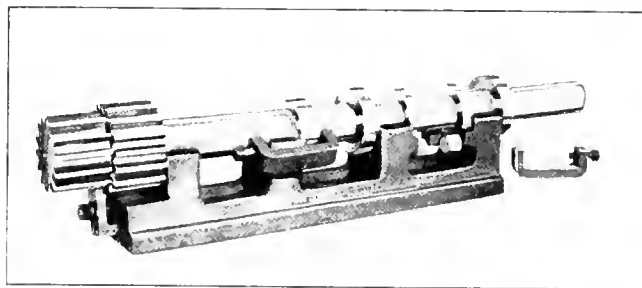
Jig for Drilling Pin-holes in Collars on their Shaft, to Insure Interchangeability
